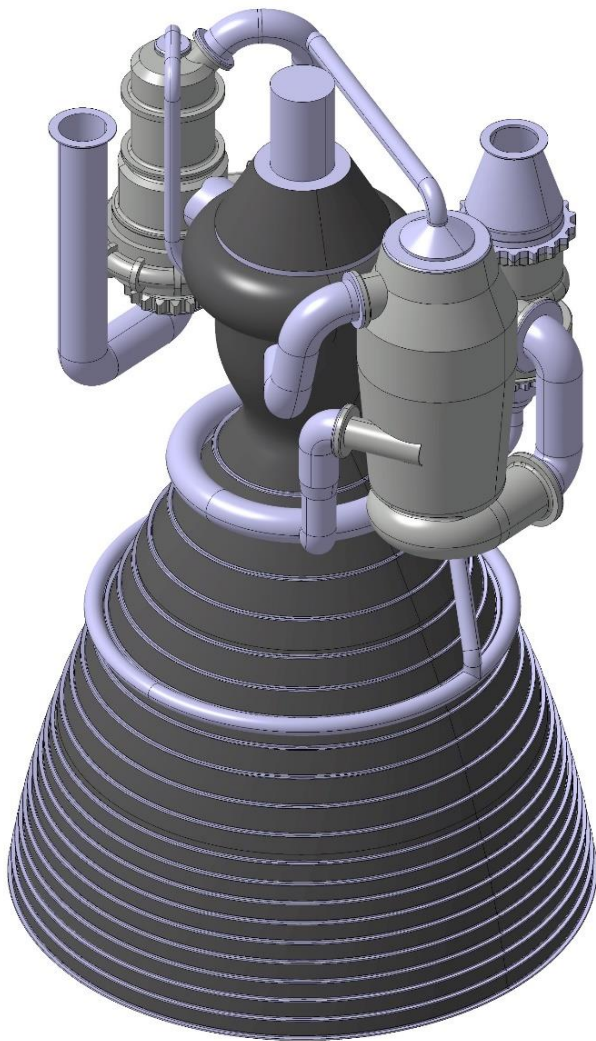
SLME V7 simplified CAD geometry with arrangement of turbomachinery
